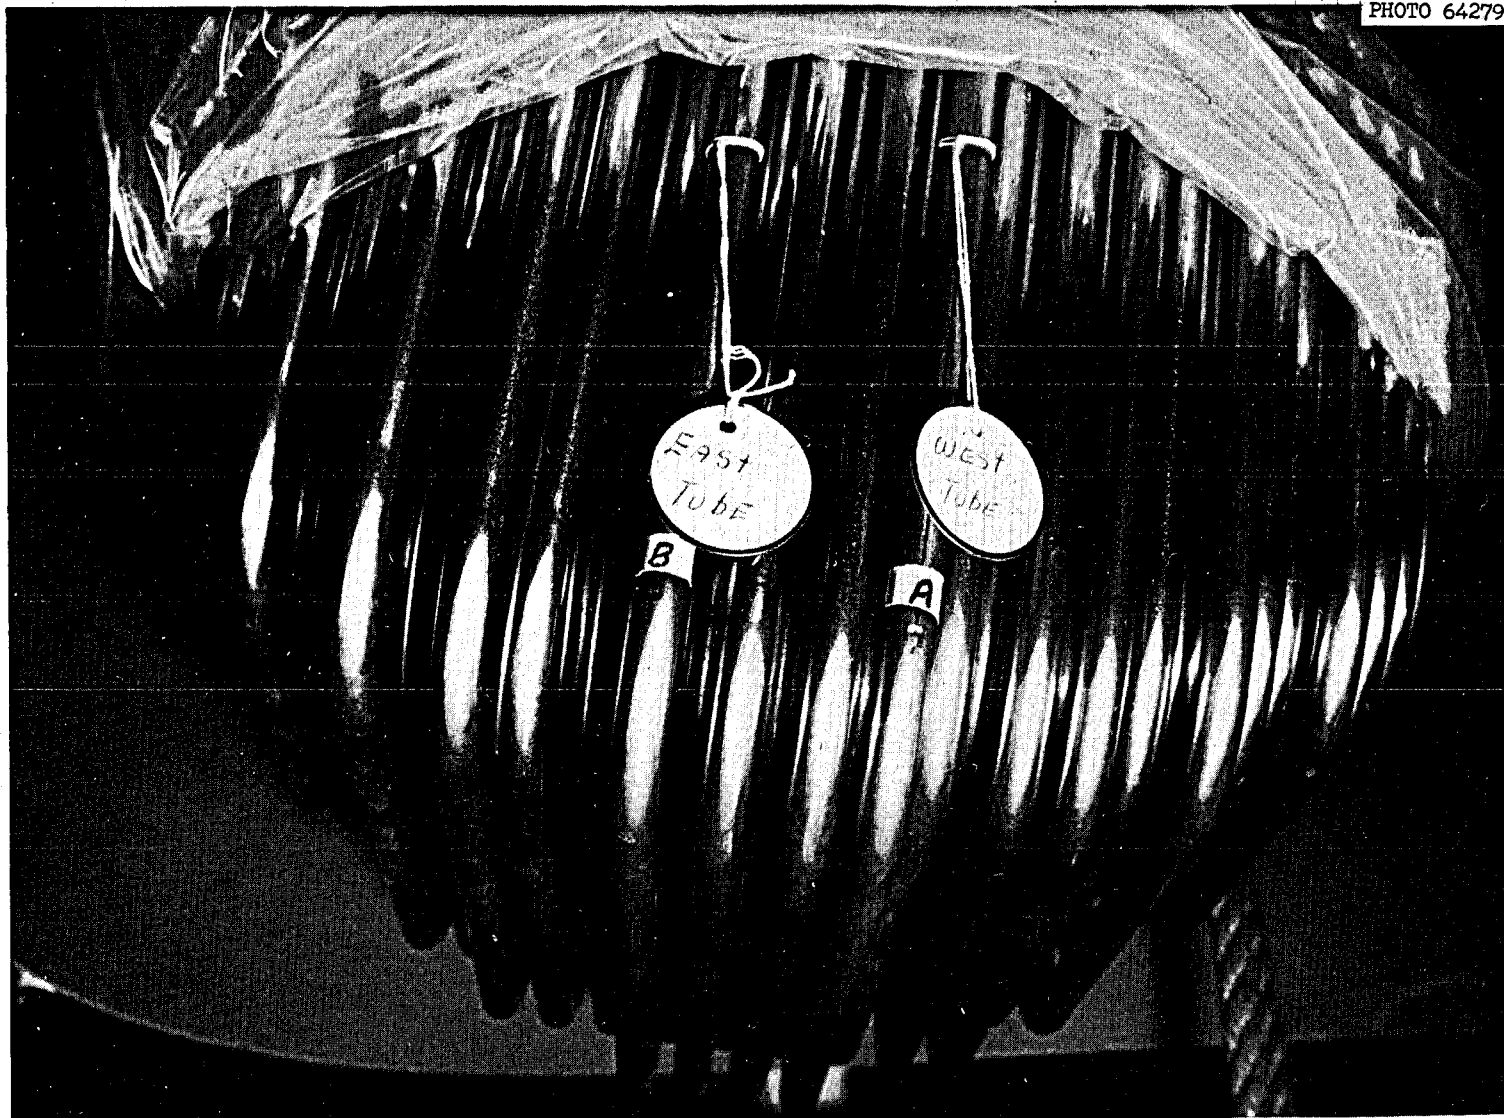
MSRE Primary Heat Exchanger Tube Damage.
